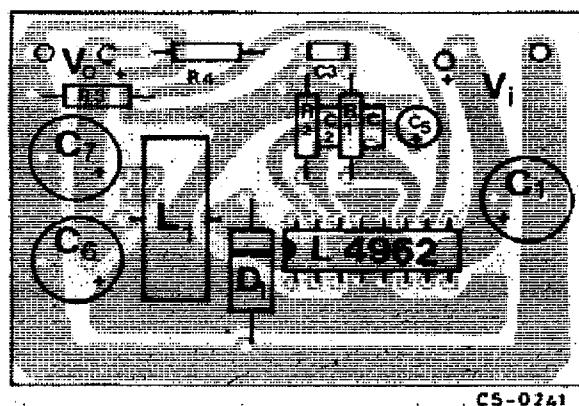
P.C. board and component layout of the circuit of Fig. 25 (1 : 1 scale)
